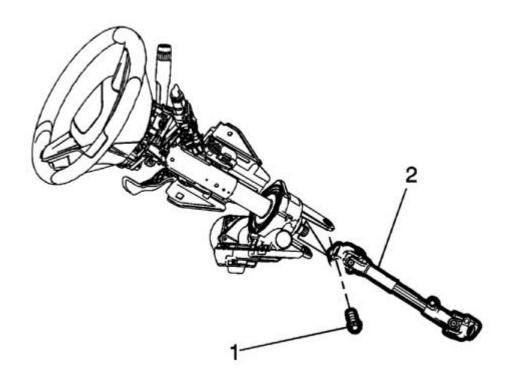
Lower Intermediate Steering Shaft & Bolt Courtesy of GENERAL MOTORS COMPANY
